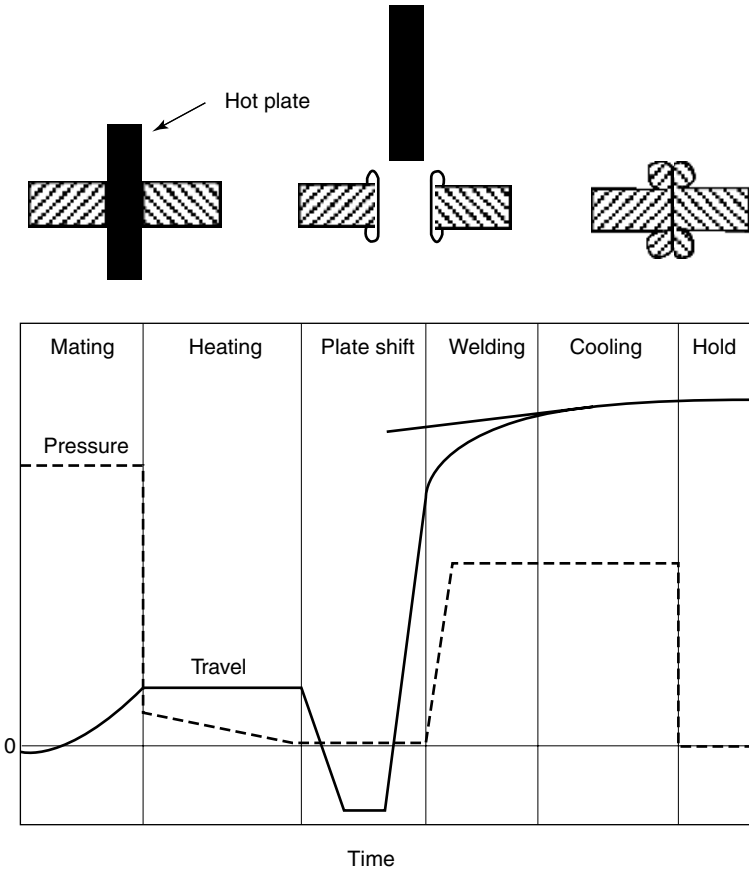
Hot plate welding process. (From Ref. 12.)
